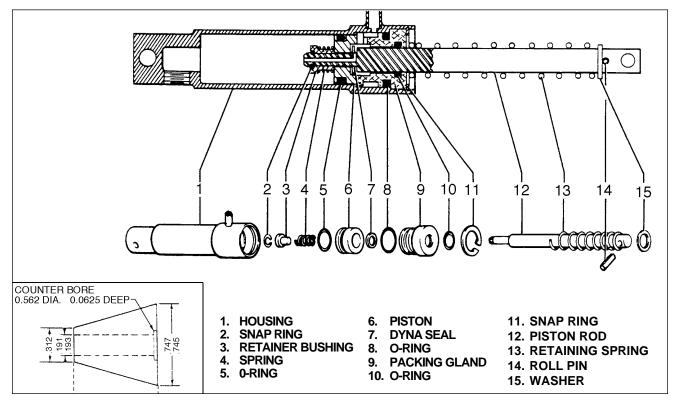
Brake Master Cylinder (Hand/Parking Brake)
